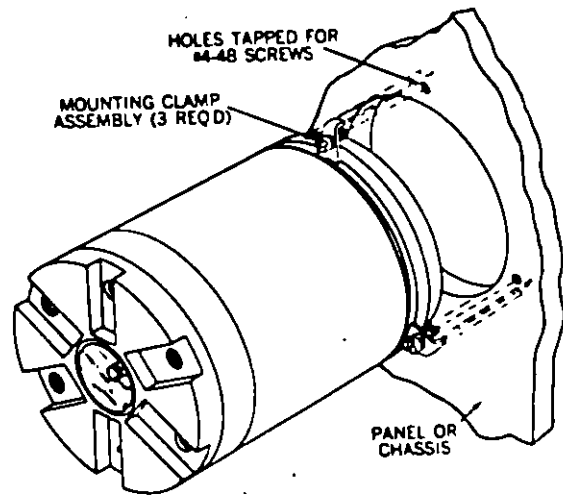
Mounting a synchro using three mounting clamp assemblies.
